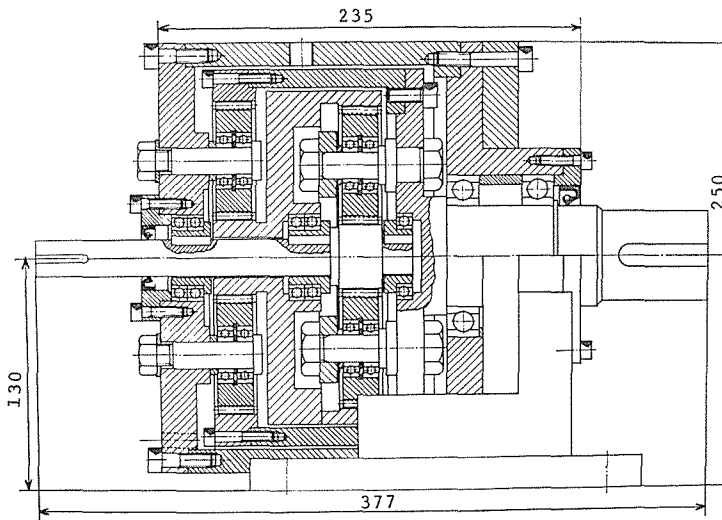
Combined Planetary Reduction Gears Built as a Trial
